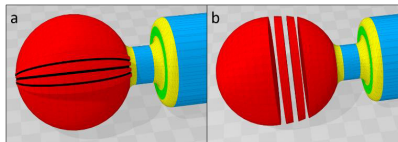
Ball joint with a) cylindrical segments, and b) segments of conic form.
